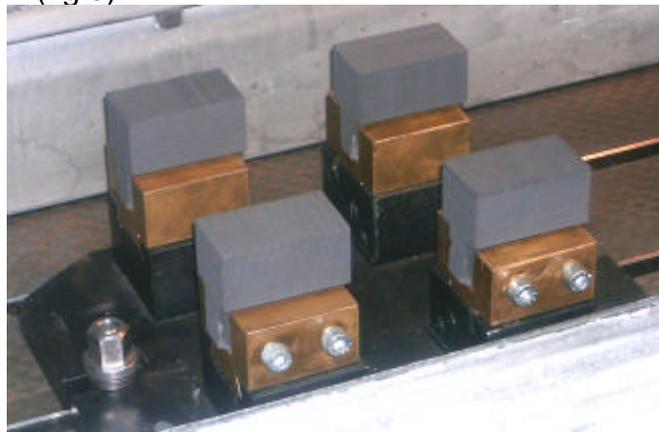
Four elements modular device, on the processing table of FADAL VMC2216 machine.
